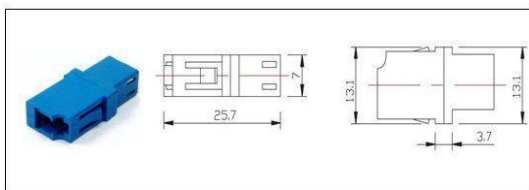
LC RJ45 Simplex Adaptor Appearance & Dimension
